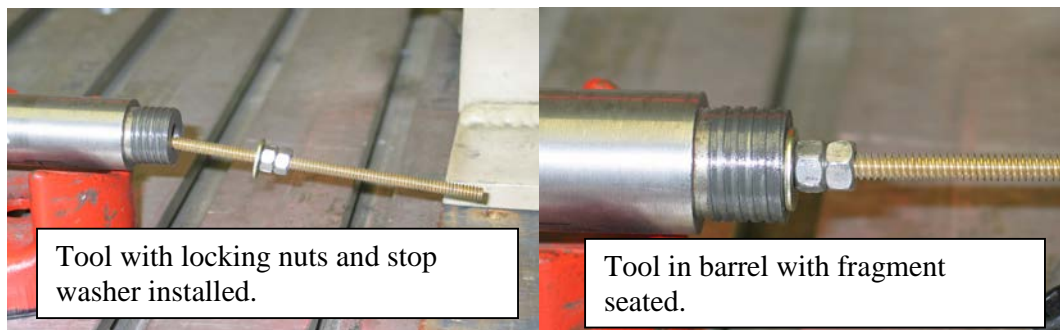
Seating tool used to precisely seat FSP projectile in gun barrel
